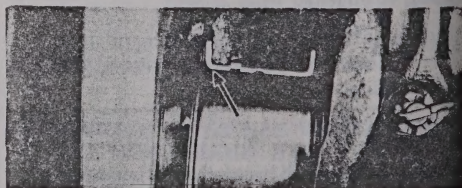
A — Flanged Bearing Controls Crankshaft End Play.
